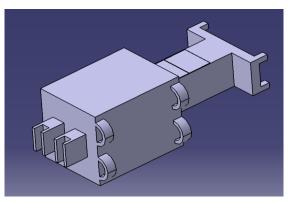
CAD of case for speed sensor and associated parts, angle 2
